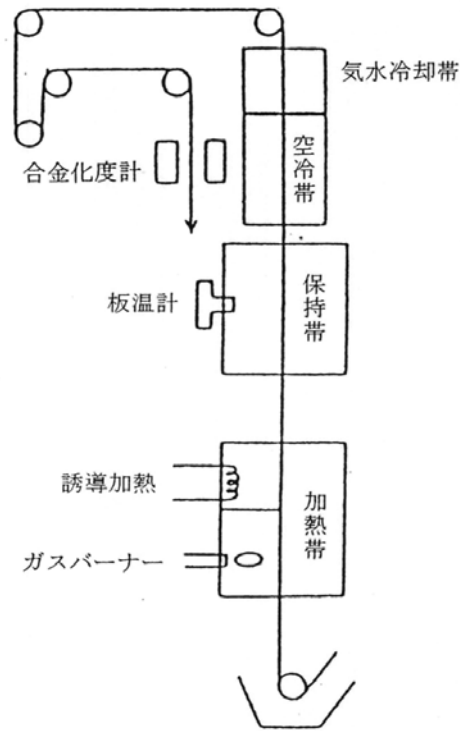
View Showing a Frame Format of Galvannealing machine
